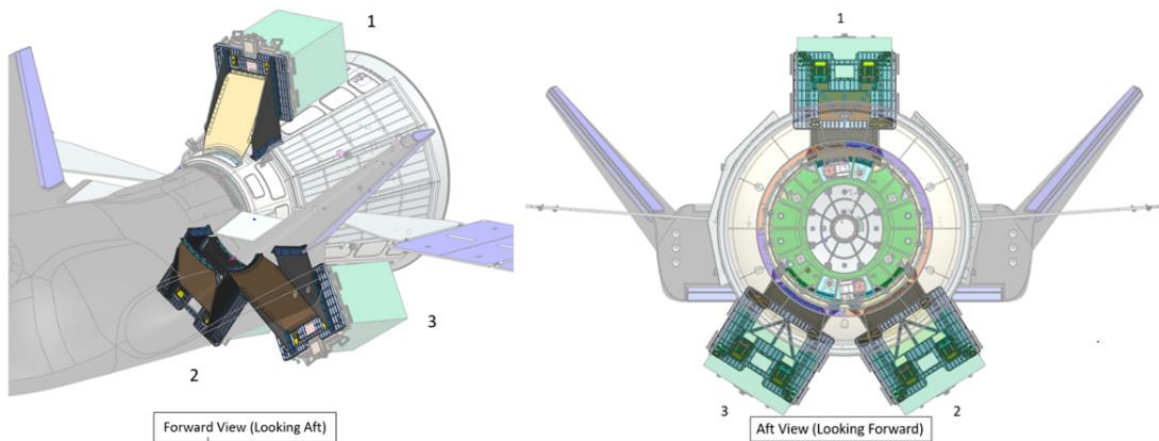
Shooting Star External Mounting Locations 1, 2, and 3
